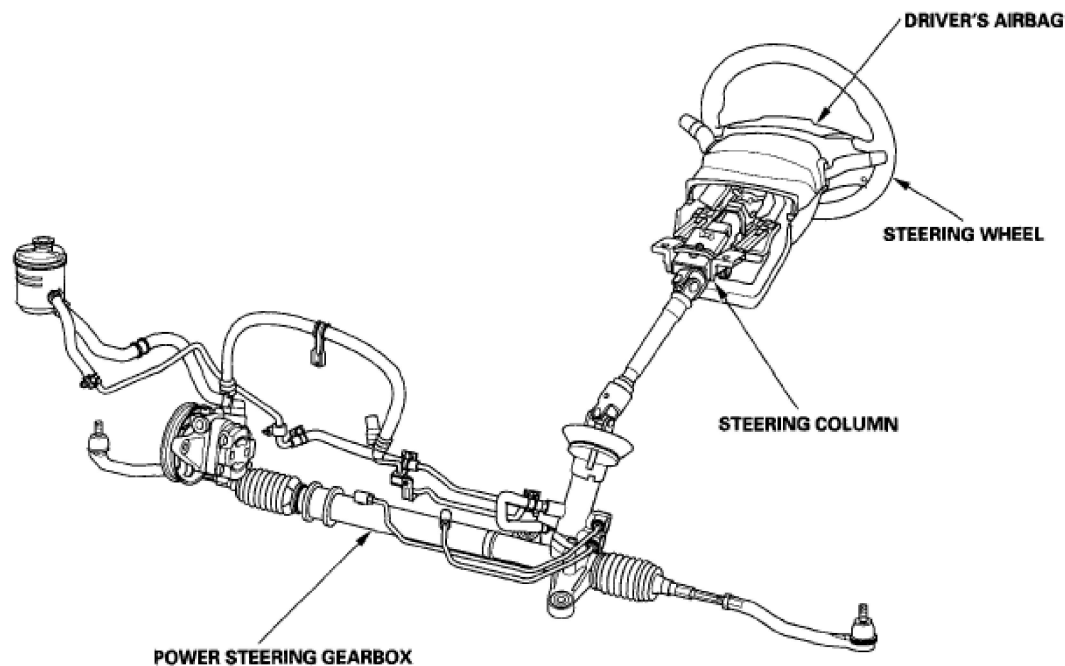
Identifying Hydraulic Power Steering Type Component Location
